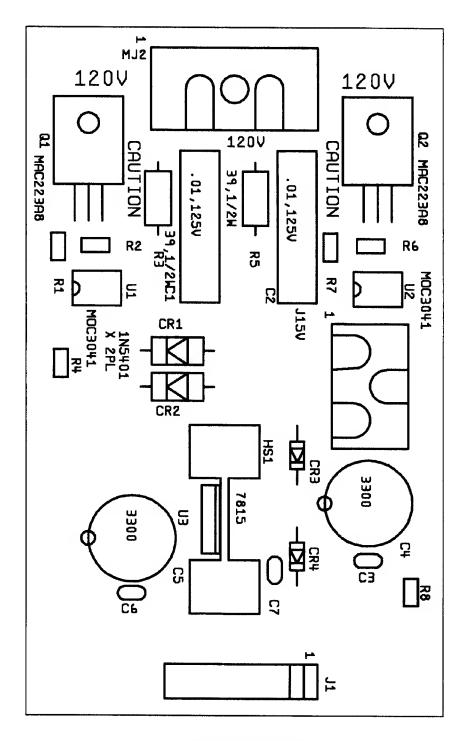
Steel Talons Rump Thump Assembly A049536-01 A
